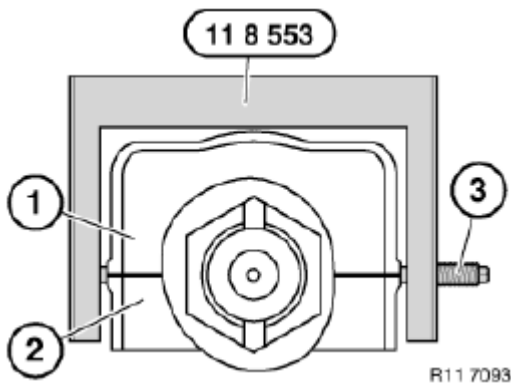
Identifying Special Tool (11 8 553), Lower Bearing Bank And Upper Bearing Bank
